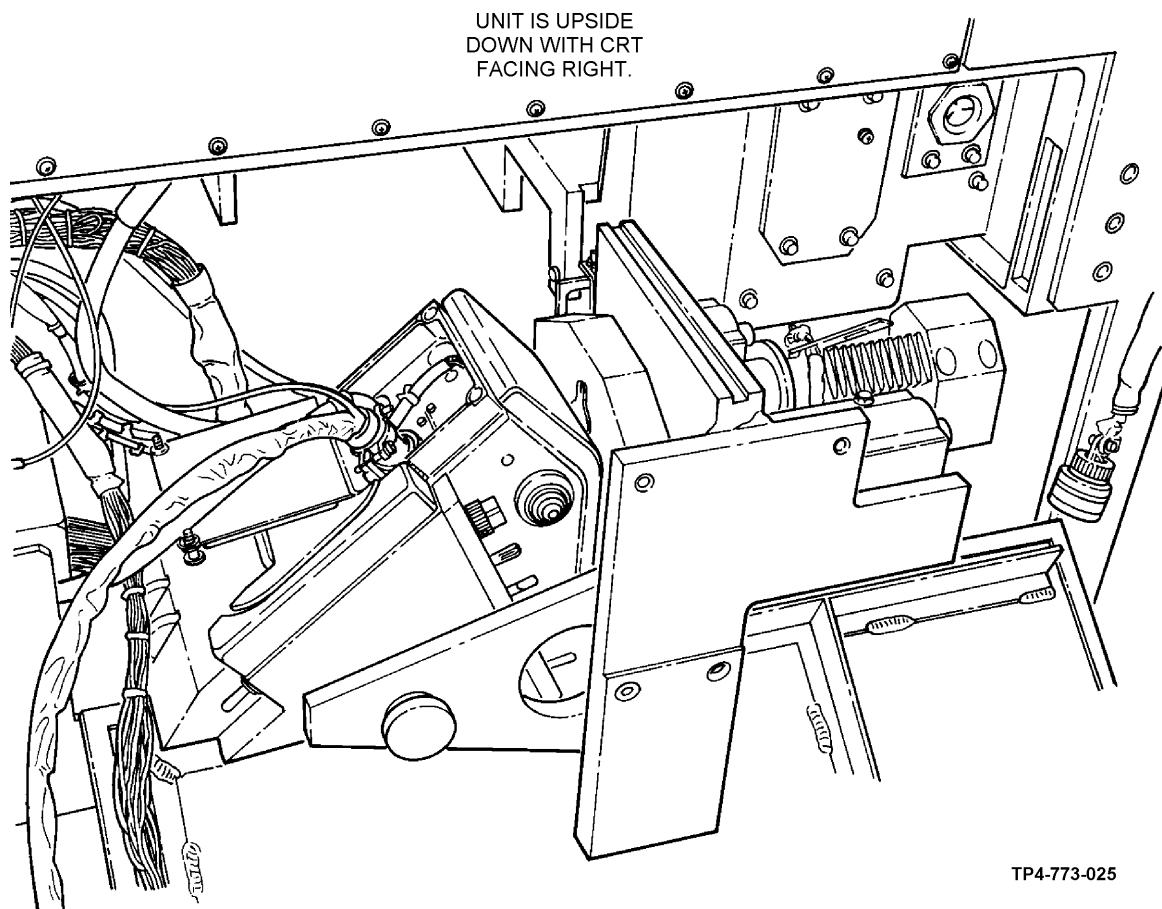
Control Panel Assembly Installed in Focus Motor Mounting Bracket in Proper Position for Cable Installation
